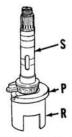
Following procedure given in text, install Yemmar 17099-99030 support plate (P) between output shaft (S) collar and rear bearing. Position 2 Yanmar special tool 17095-99070 (R) as a support and press output shaft out of rear bearing.
